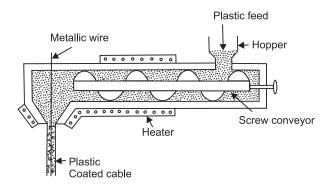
Moulding of Cable by Vertical Extrusion Moulding
